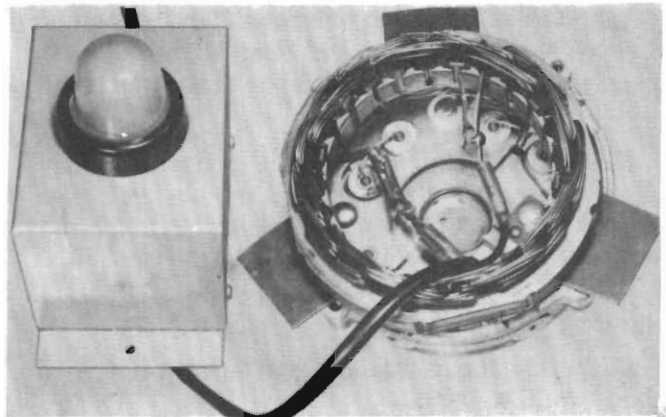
Testing Stator for Grounds (using 240 volt test lamp) (typical view)
